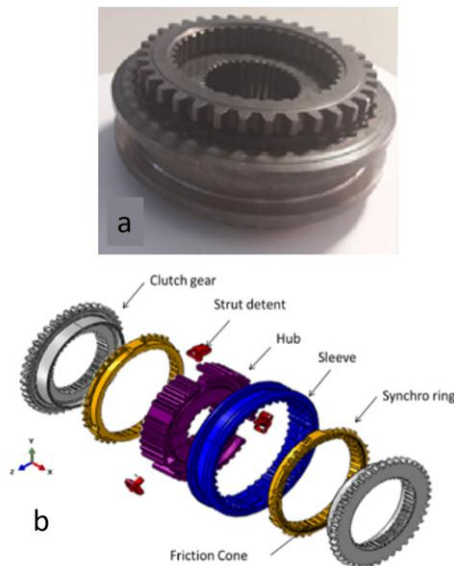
(a) Single cone synchronizer sample and (b) the synchronizer components presented in an exploded view.
